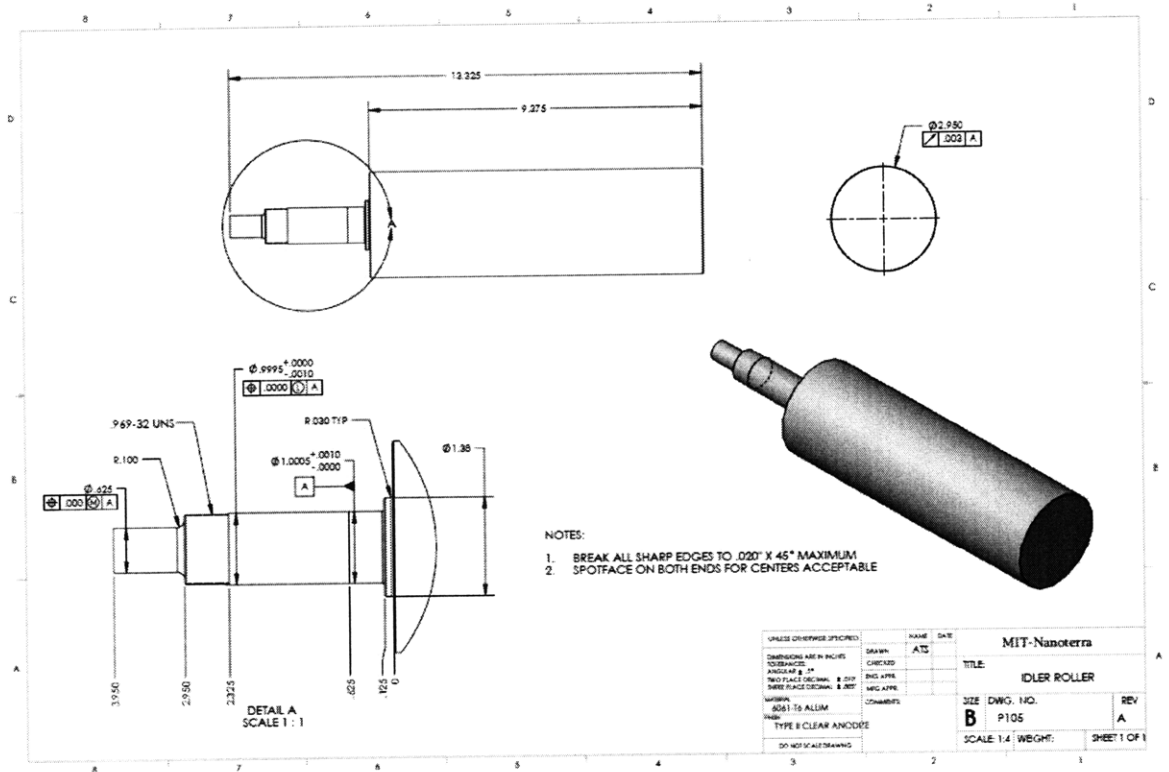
A typical engineering drawing used in this project for communicating part dimensions to machinists. Geometric and linear tolerancing was used to communicate critical dimensions and characteristics. The rest of the part drawings can be found in Appendix B.
